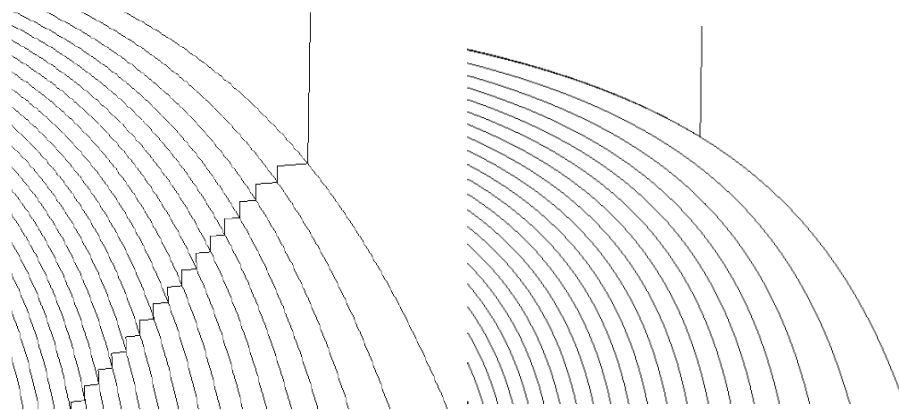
Left: profile tool path, right: helical tool path generated by HeToPac [38]
